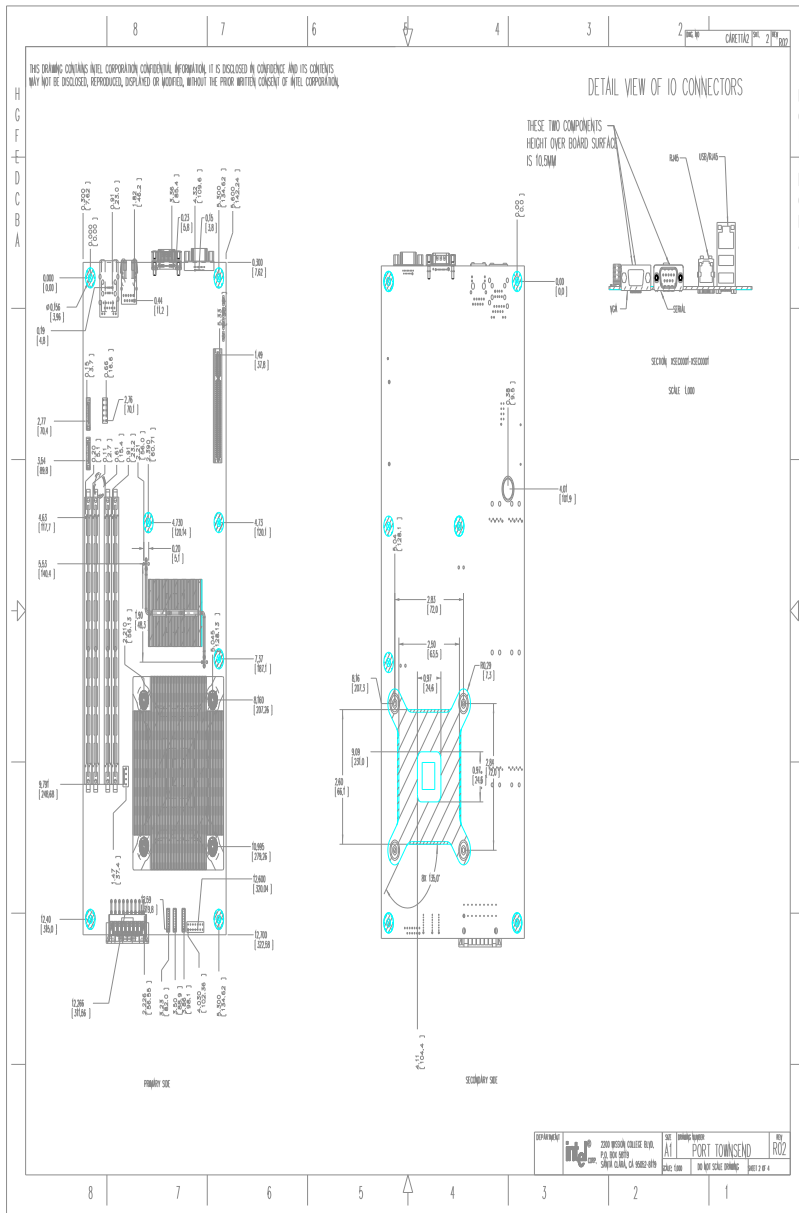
Intel® Server Board S3000PT Mechanical Drawing
